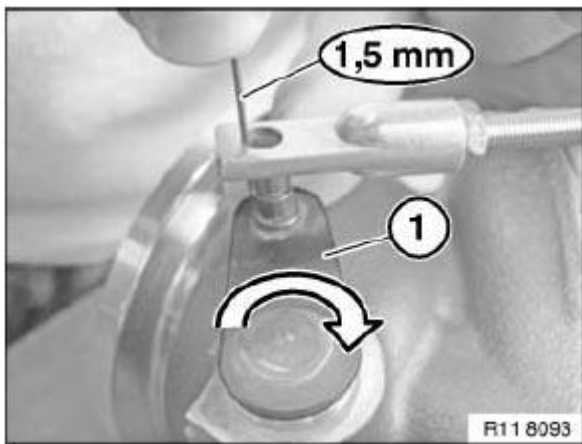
Identifying Gap Dimension Between Turnbuckle And Adjusting Lever
